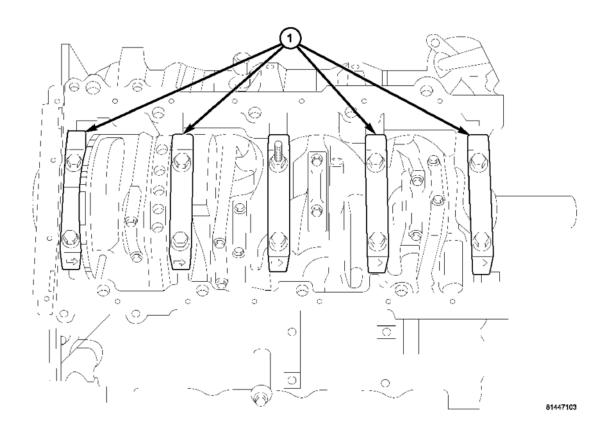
Main Bearing Caps Courtesy of CHRYSLER LLC
